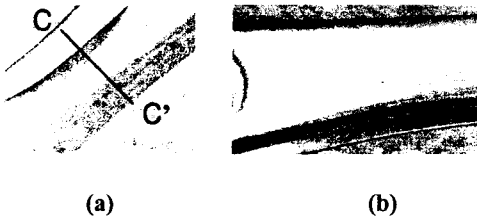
Surface defect inspected in the final product: (a) analysis; (b) experiment
